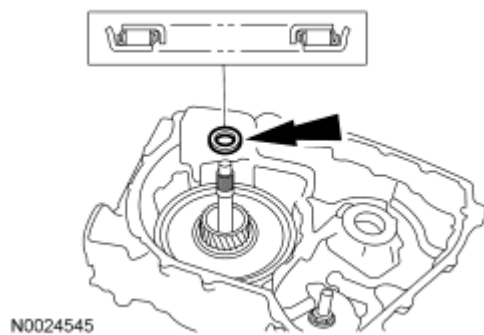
No. 5 Low/Intermediate Sun Gear Thrust Bearing
